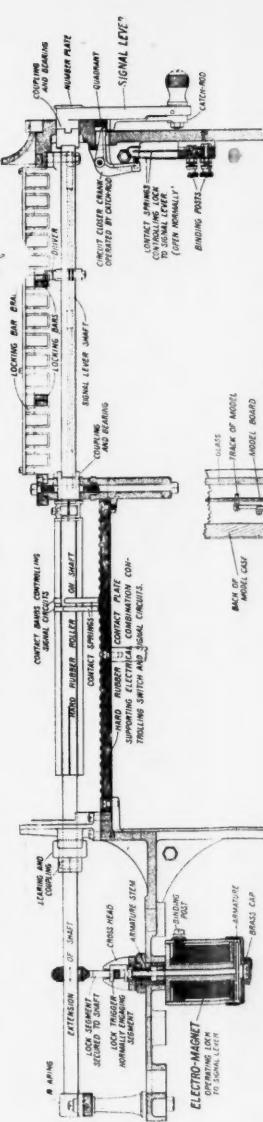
SECTIONAL VIEW OF MACHINE ON CENTER LINE
